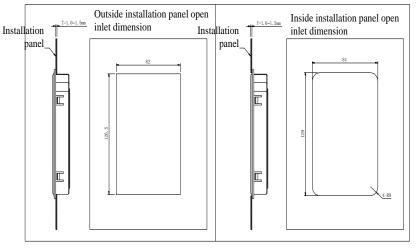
PI500 keyboard installation open inlet dimension(mm)
